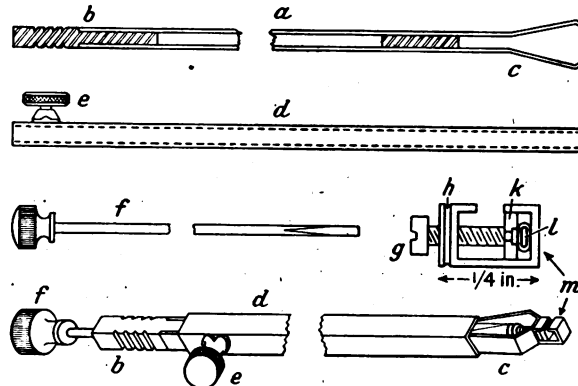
Adjustable artery clamp and applicator: (a) clamp holder; (b) serrated end; (c) spring-steel jaws; (d) applicator handle 8 in. long; (e) locking screw; (f) screwdriver; (g) compression screw; (h) slot for applicator jaws; (k) compression plate; (l) artery; (m) adjustable artery clamp.
